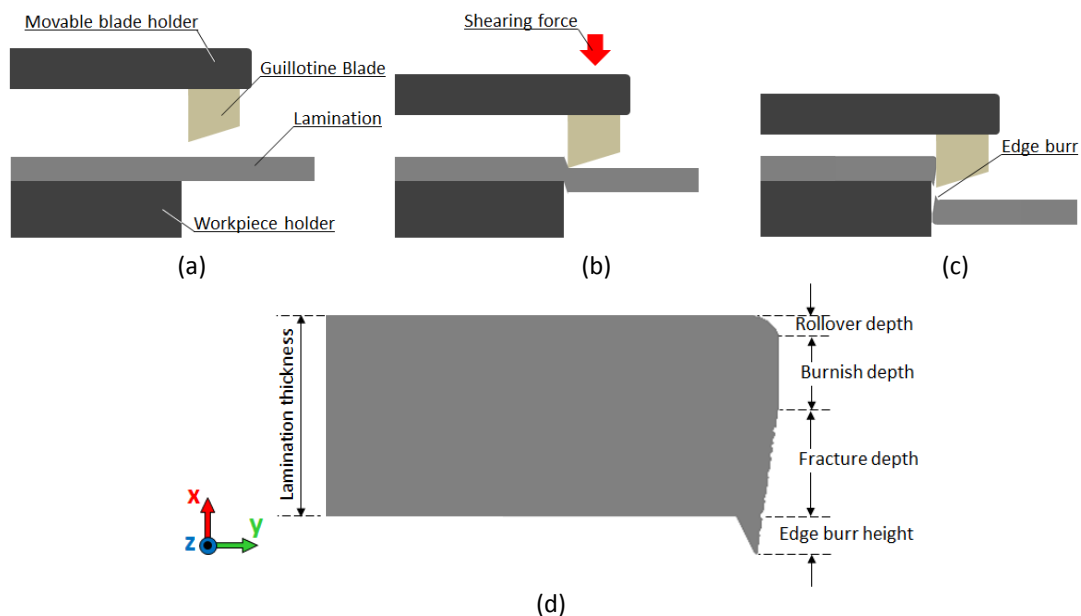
(a) Cutting process of a lamination and created edge burr
